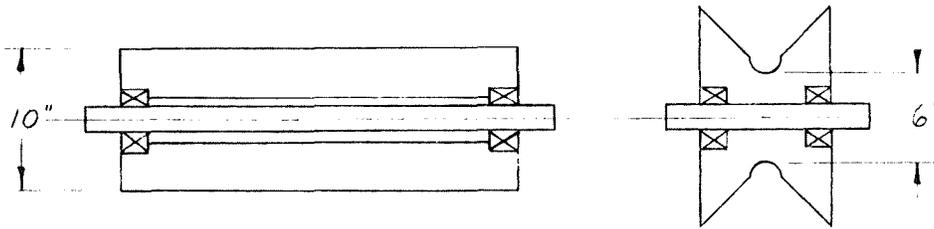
TYPICAL SUPPORT ROLLER AND SHEAVE DESIGNS
